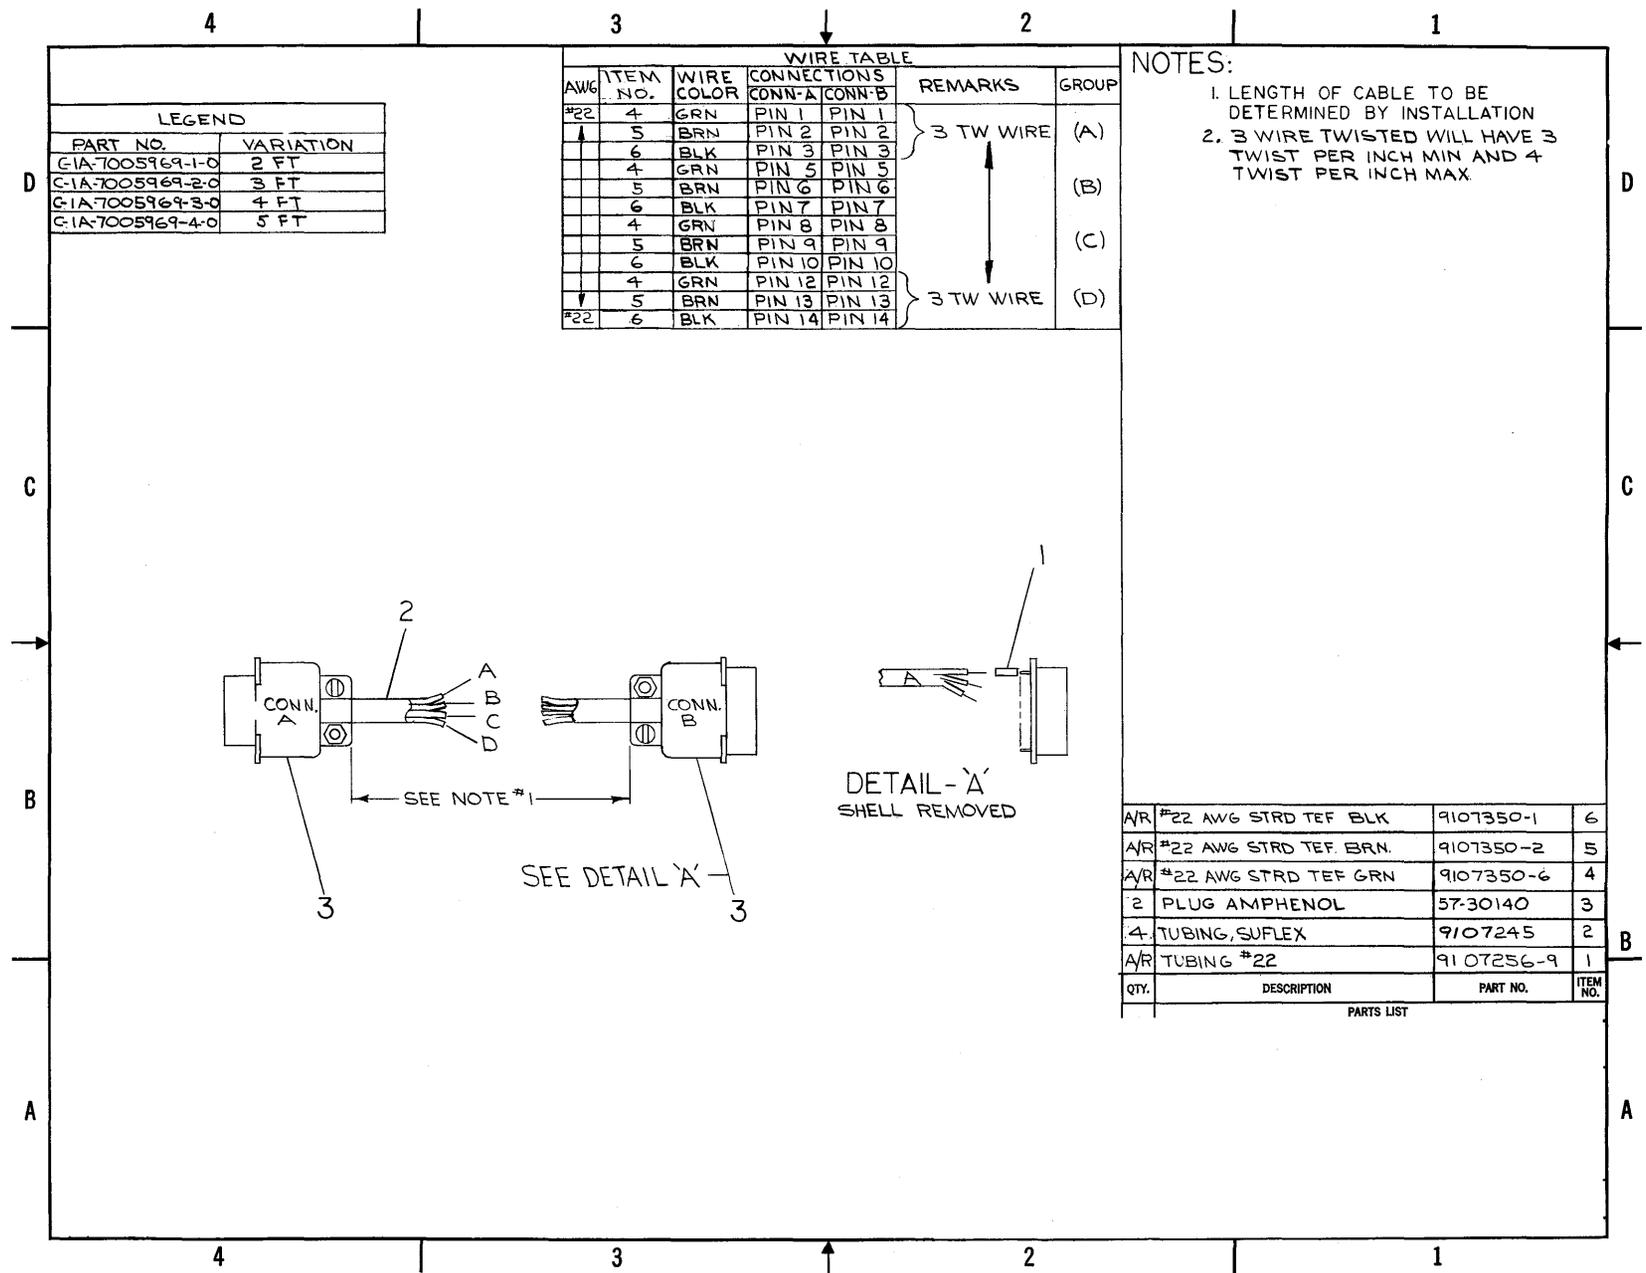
C-IA-7005969-0-0 H303 Amplifier Mounting Panel Cable Assembly Diagram
